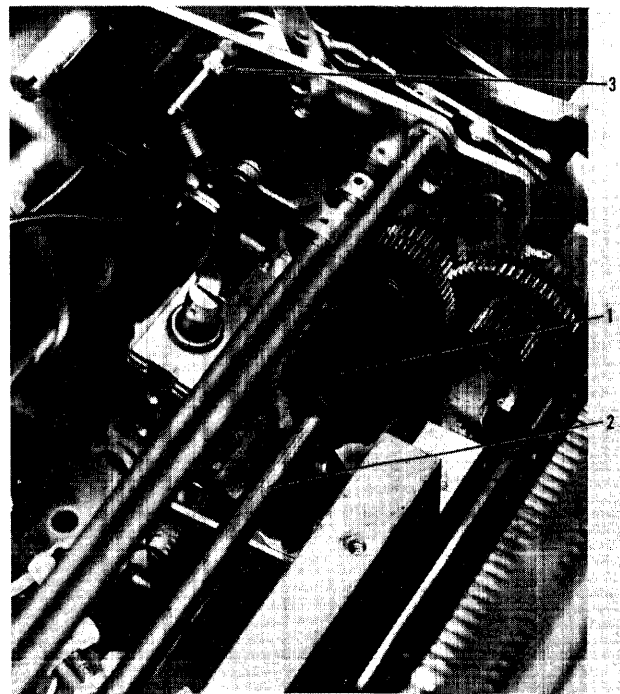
Frame Assembly (Top View), Split Platen Printer
